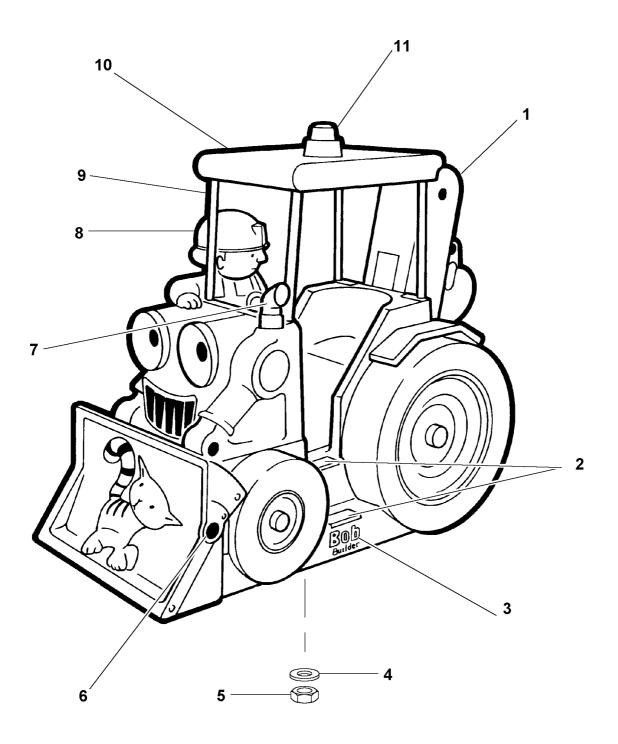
Bob The Builder Body (Scoop) Shell Assembly
